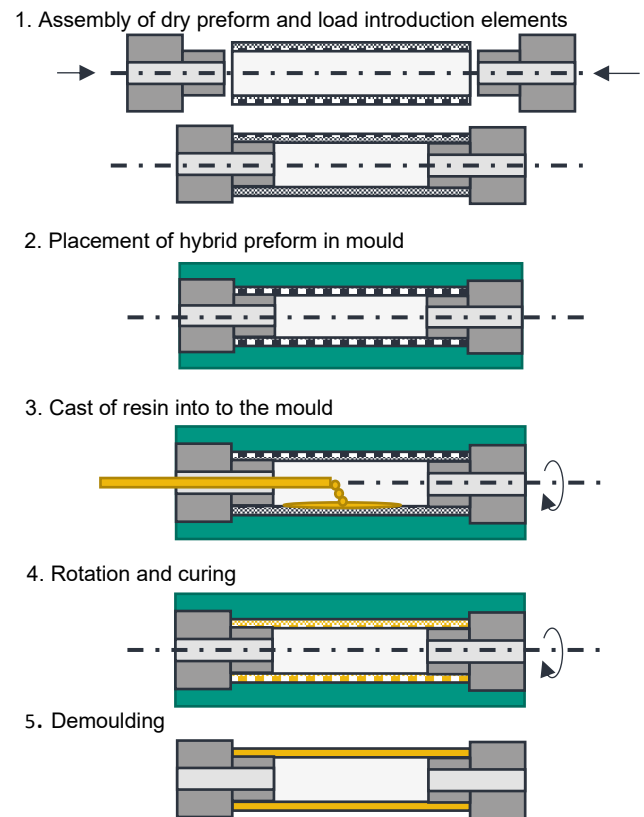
Process chain of rotational moulding and intrinsic joining for CFRP-metal hollow shafts
